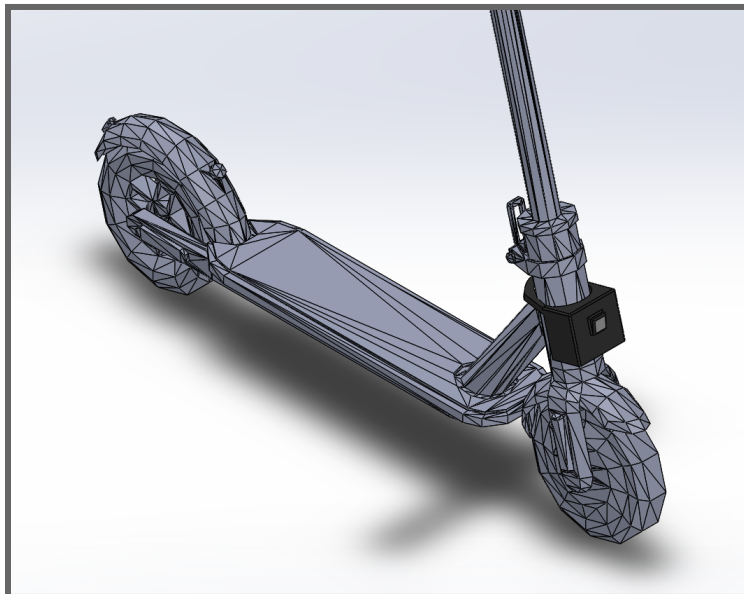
CAD Drawing of the Case Housing Radar and Raspberry Pi
